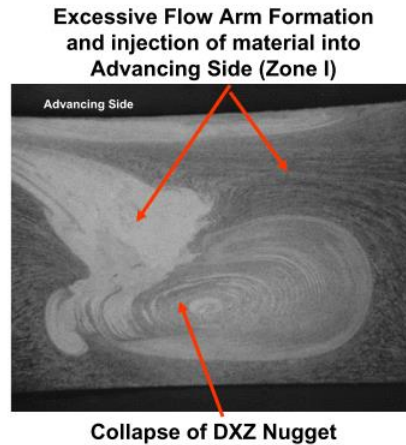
Example of Nugget Collapse of a Friction Stir Welded Joint
